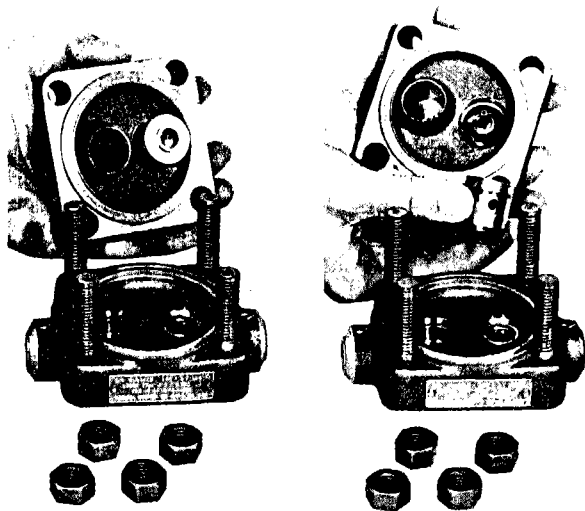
Trap disassembled exposing strainer and "cage" arrangement of all trap working parts mounted in the bonnet.
